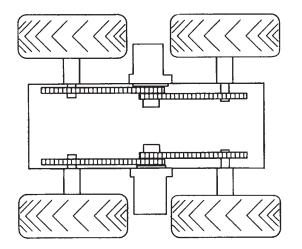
A Reduction System Driven by a Hydraulic Motor
